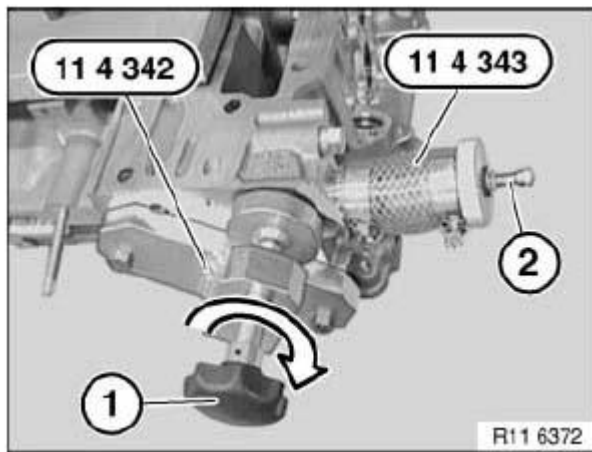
Identifying Special Tool (11 4 342), (11 4 343), Knurled Screw And Valve
